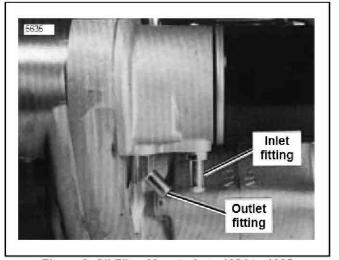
Oil Filter Mount - Late 1984 to 1985 (Alternator Equipped)
